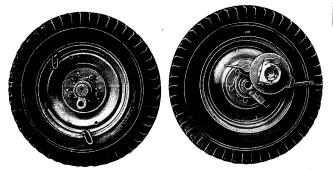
WHEEL WITH SPRING DEVICE FOR WEAPONS B1 and B1A1 — GENERAL VIEW
